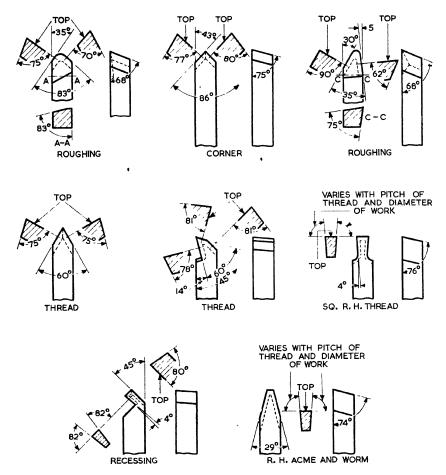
CORRECT CLEARANCES AND CUTTING ANGLES FOR INSERTED BORING TOOLS
